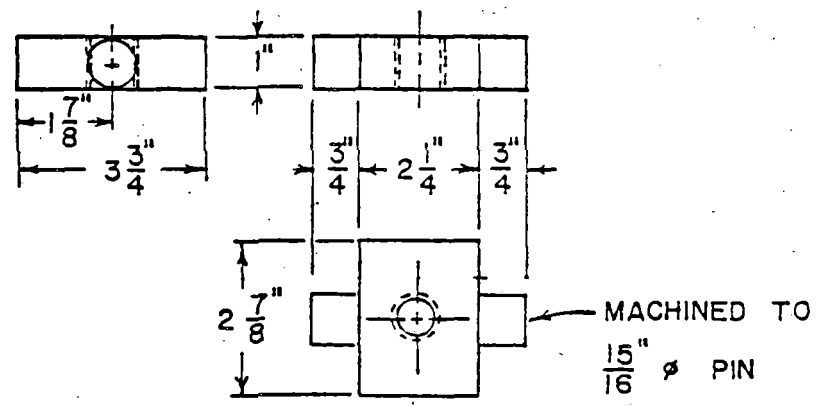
STRUCTURAL LOAD FRAME SECTIONS
